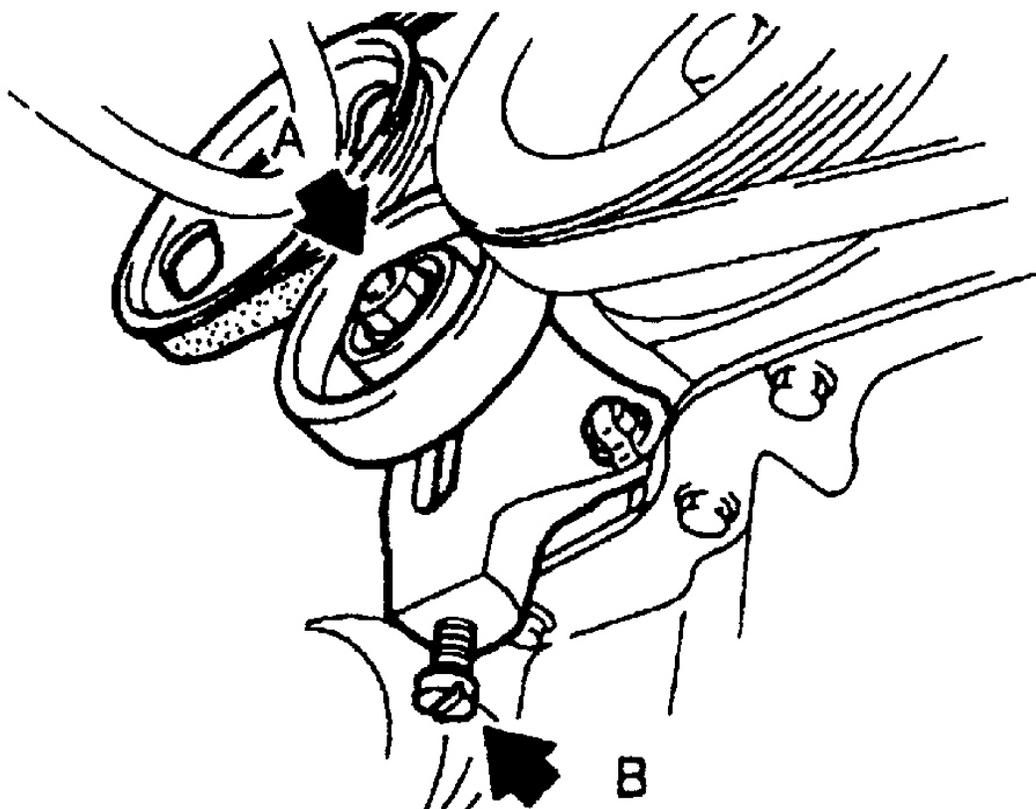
Adjusting Alternator Belt (Millenia, 2.5L)
